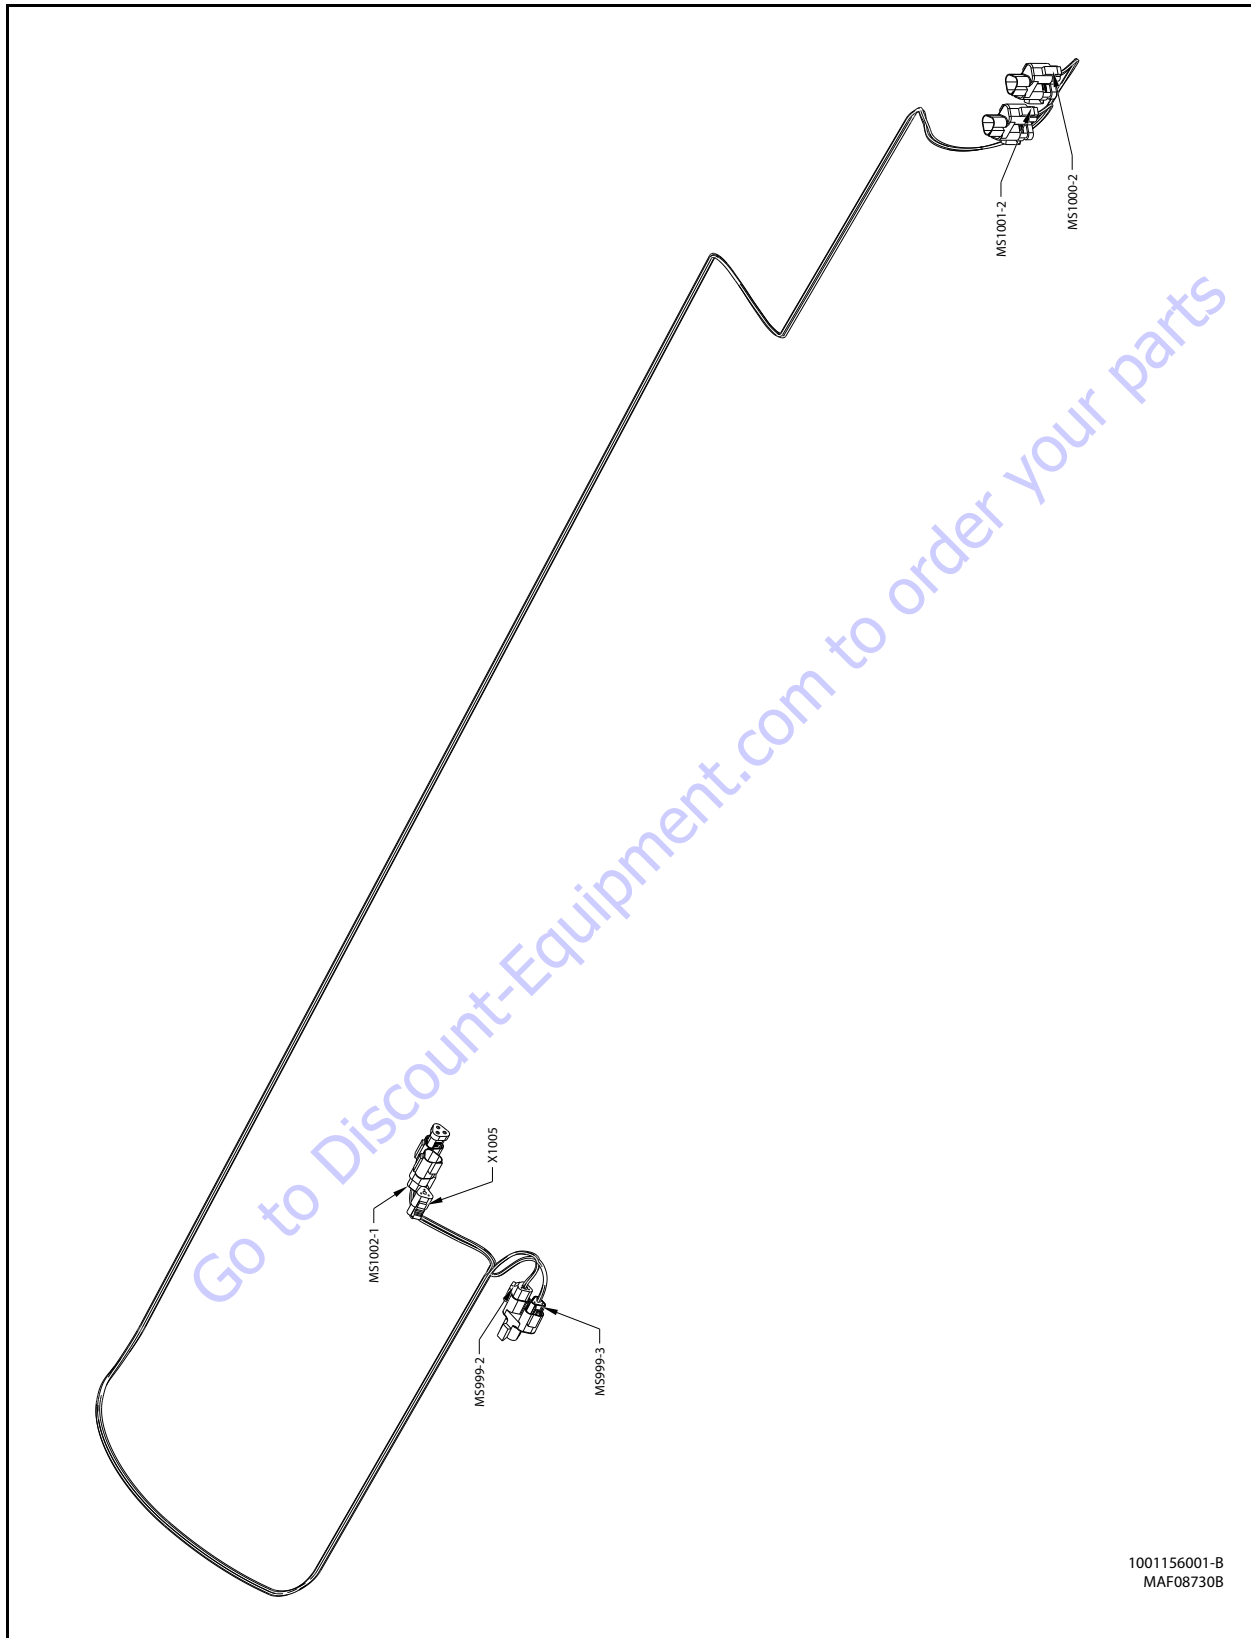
CAN Engine Harness - Sheet 2 of 2
